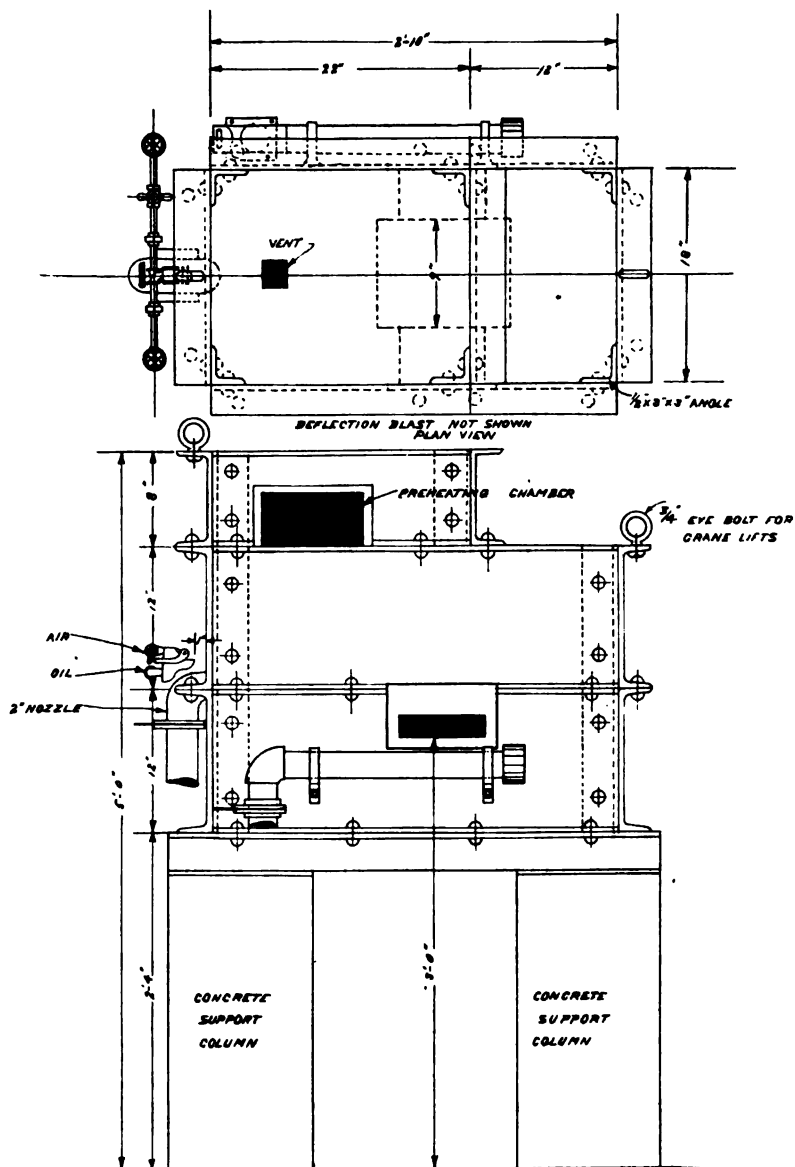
HIGH-SPEED TOOL-STEEL FURNACE.
